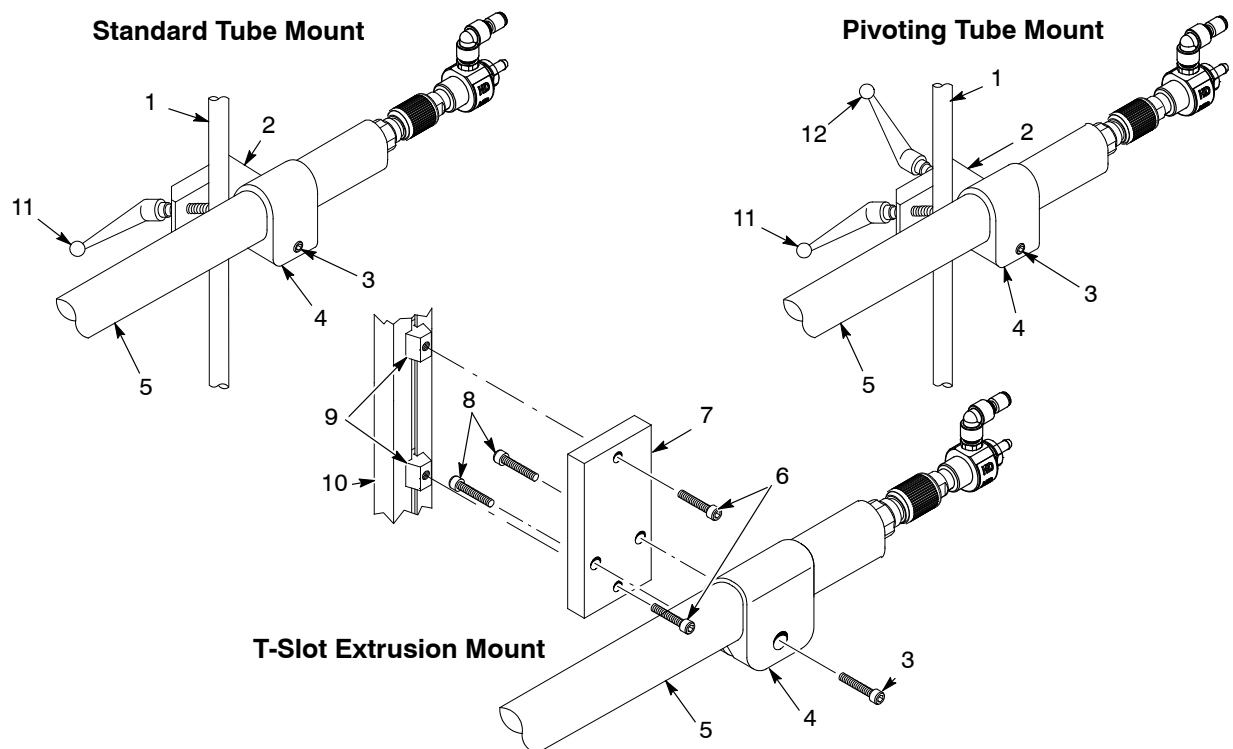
Tube-Mount Spray Gun Mounting Assemblies
